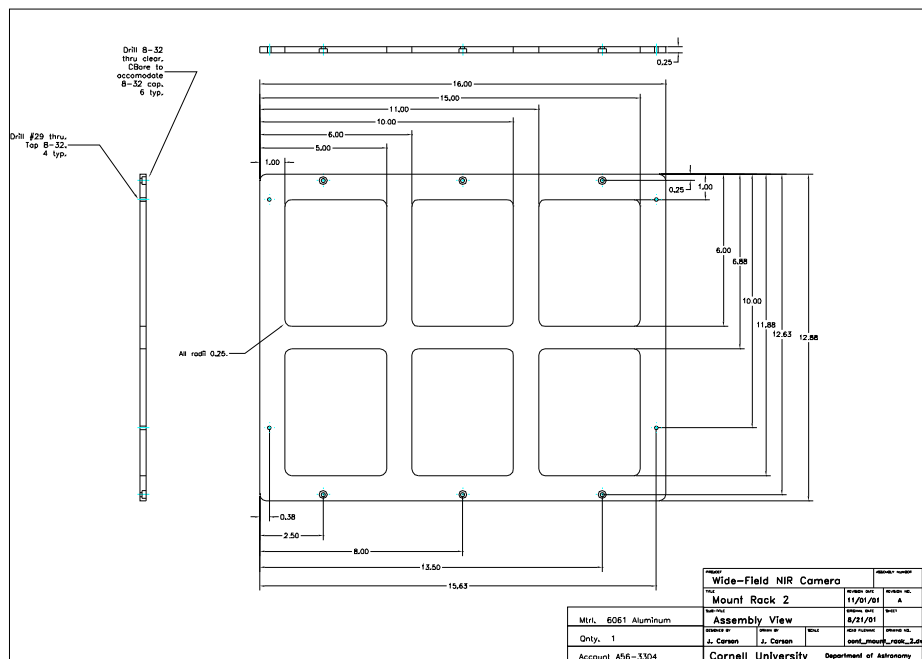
Motor Controller Box Support Rack. This piece provides the interface between the Dewar Support Yokes and the Motor Controller Box Adaptor Plate.
